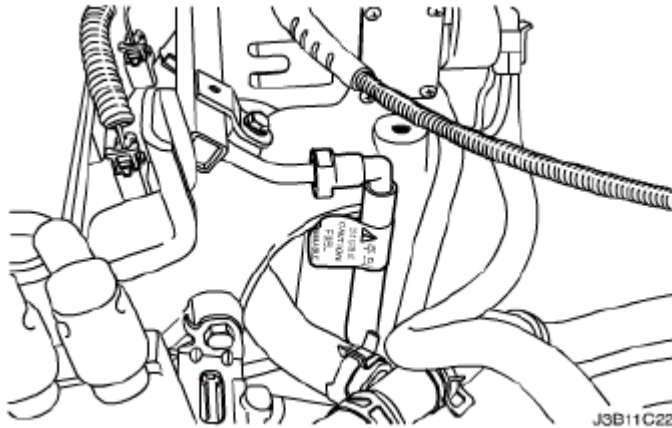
Identifying Lower Radiator Hose From Coolant Pipe
